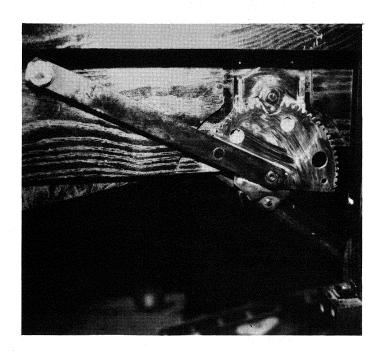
Door check arm (A rivet is installed instead of the cotter key at final assembly, a slotted washer is used at the back of the rubber bumper to adjust the degree of the door opening)
